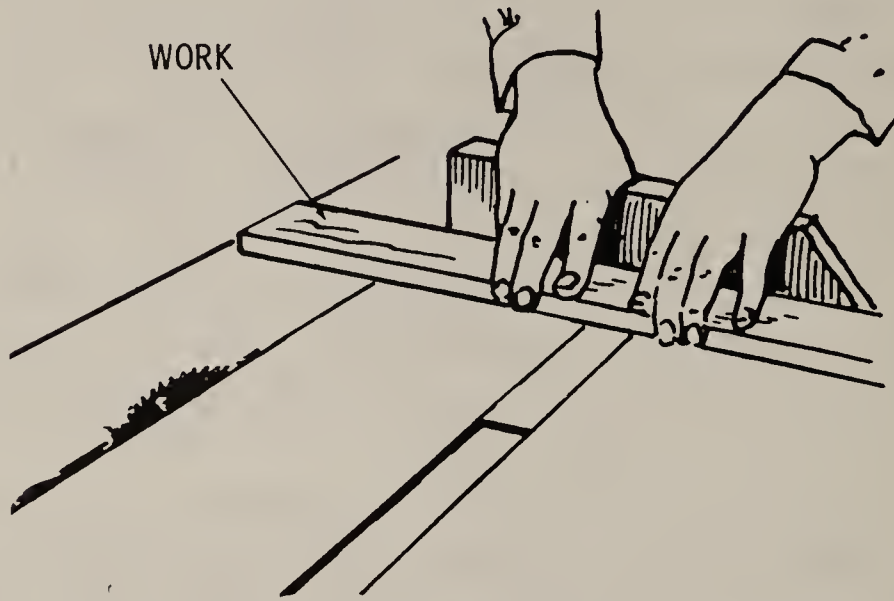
Method of cutting longer pieces of stock to length on circular saw. Guard is removed for purpose of illustration.
